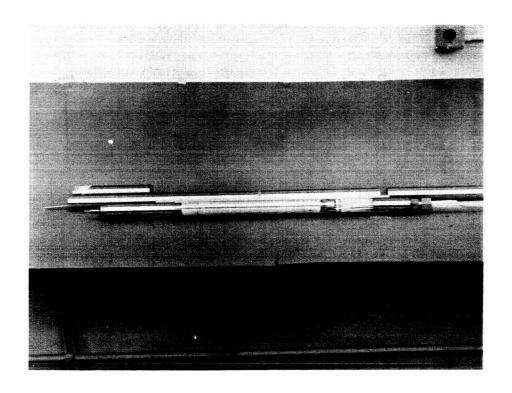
Assembled Capsule Prior to Installation in Outer Shell
